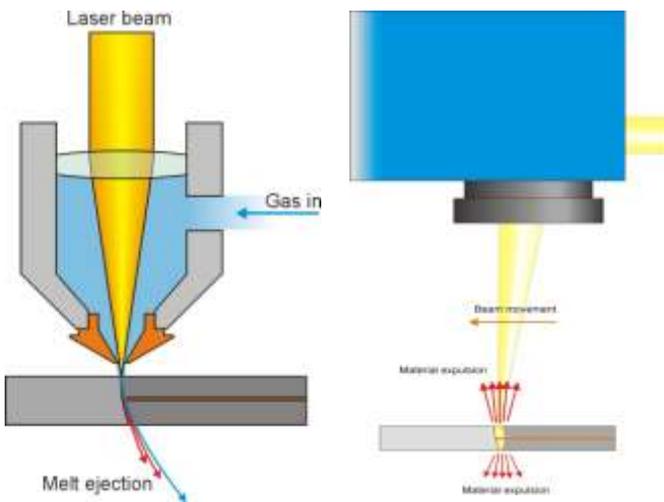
Cutting with fixed optic (left) and galvanometer scanner (right)
